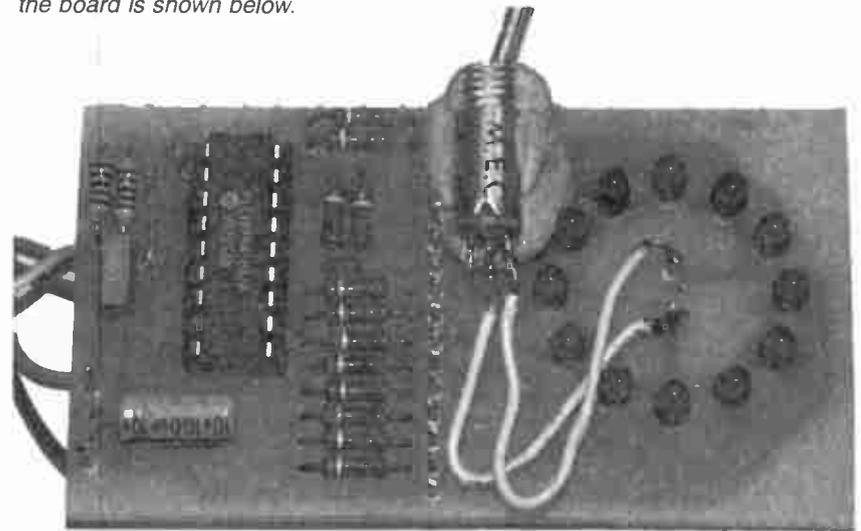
PICtogram printed circuit board (p.c.b.) component layout and full-size copper foil pattern. The completed p.c.b. with the "programming" switch attached to the board is shown below.
